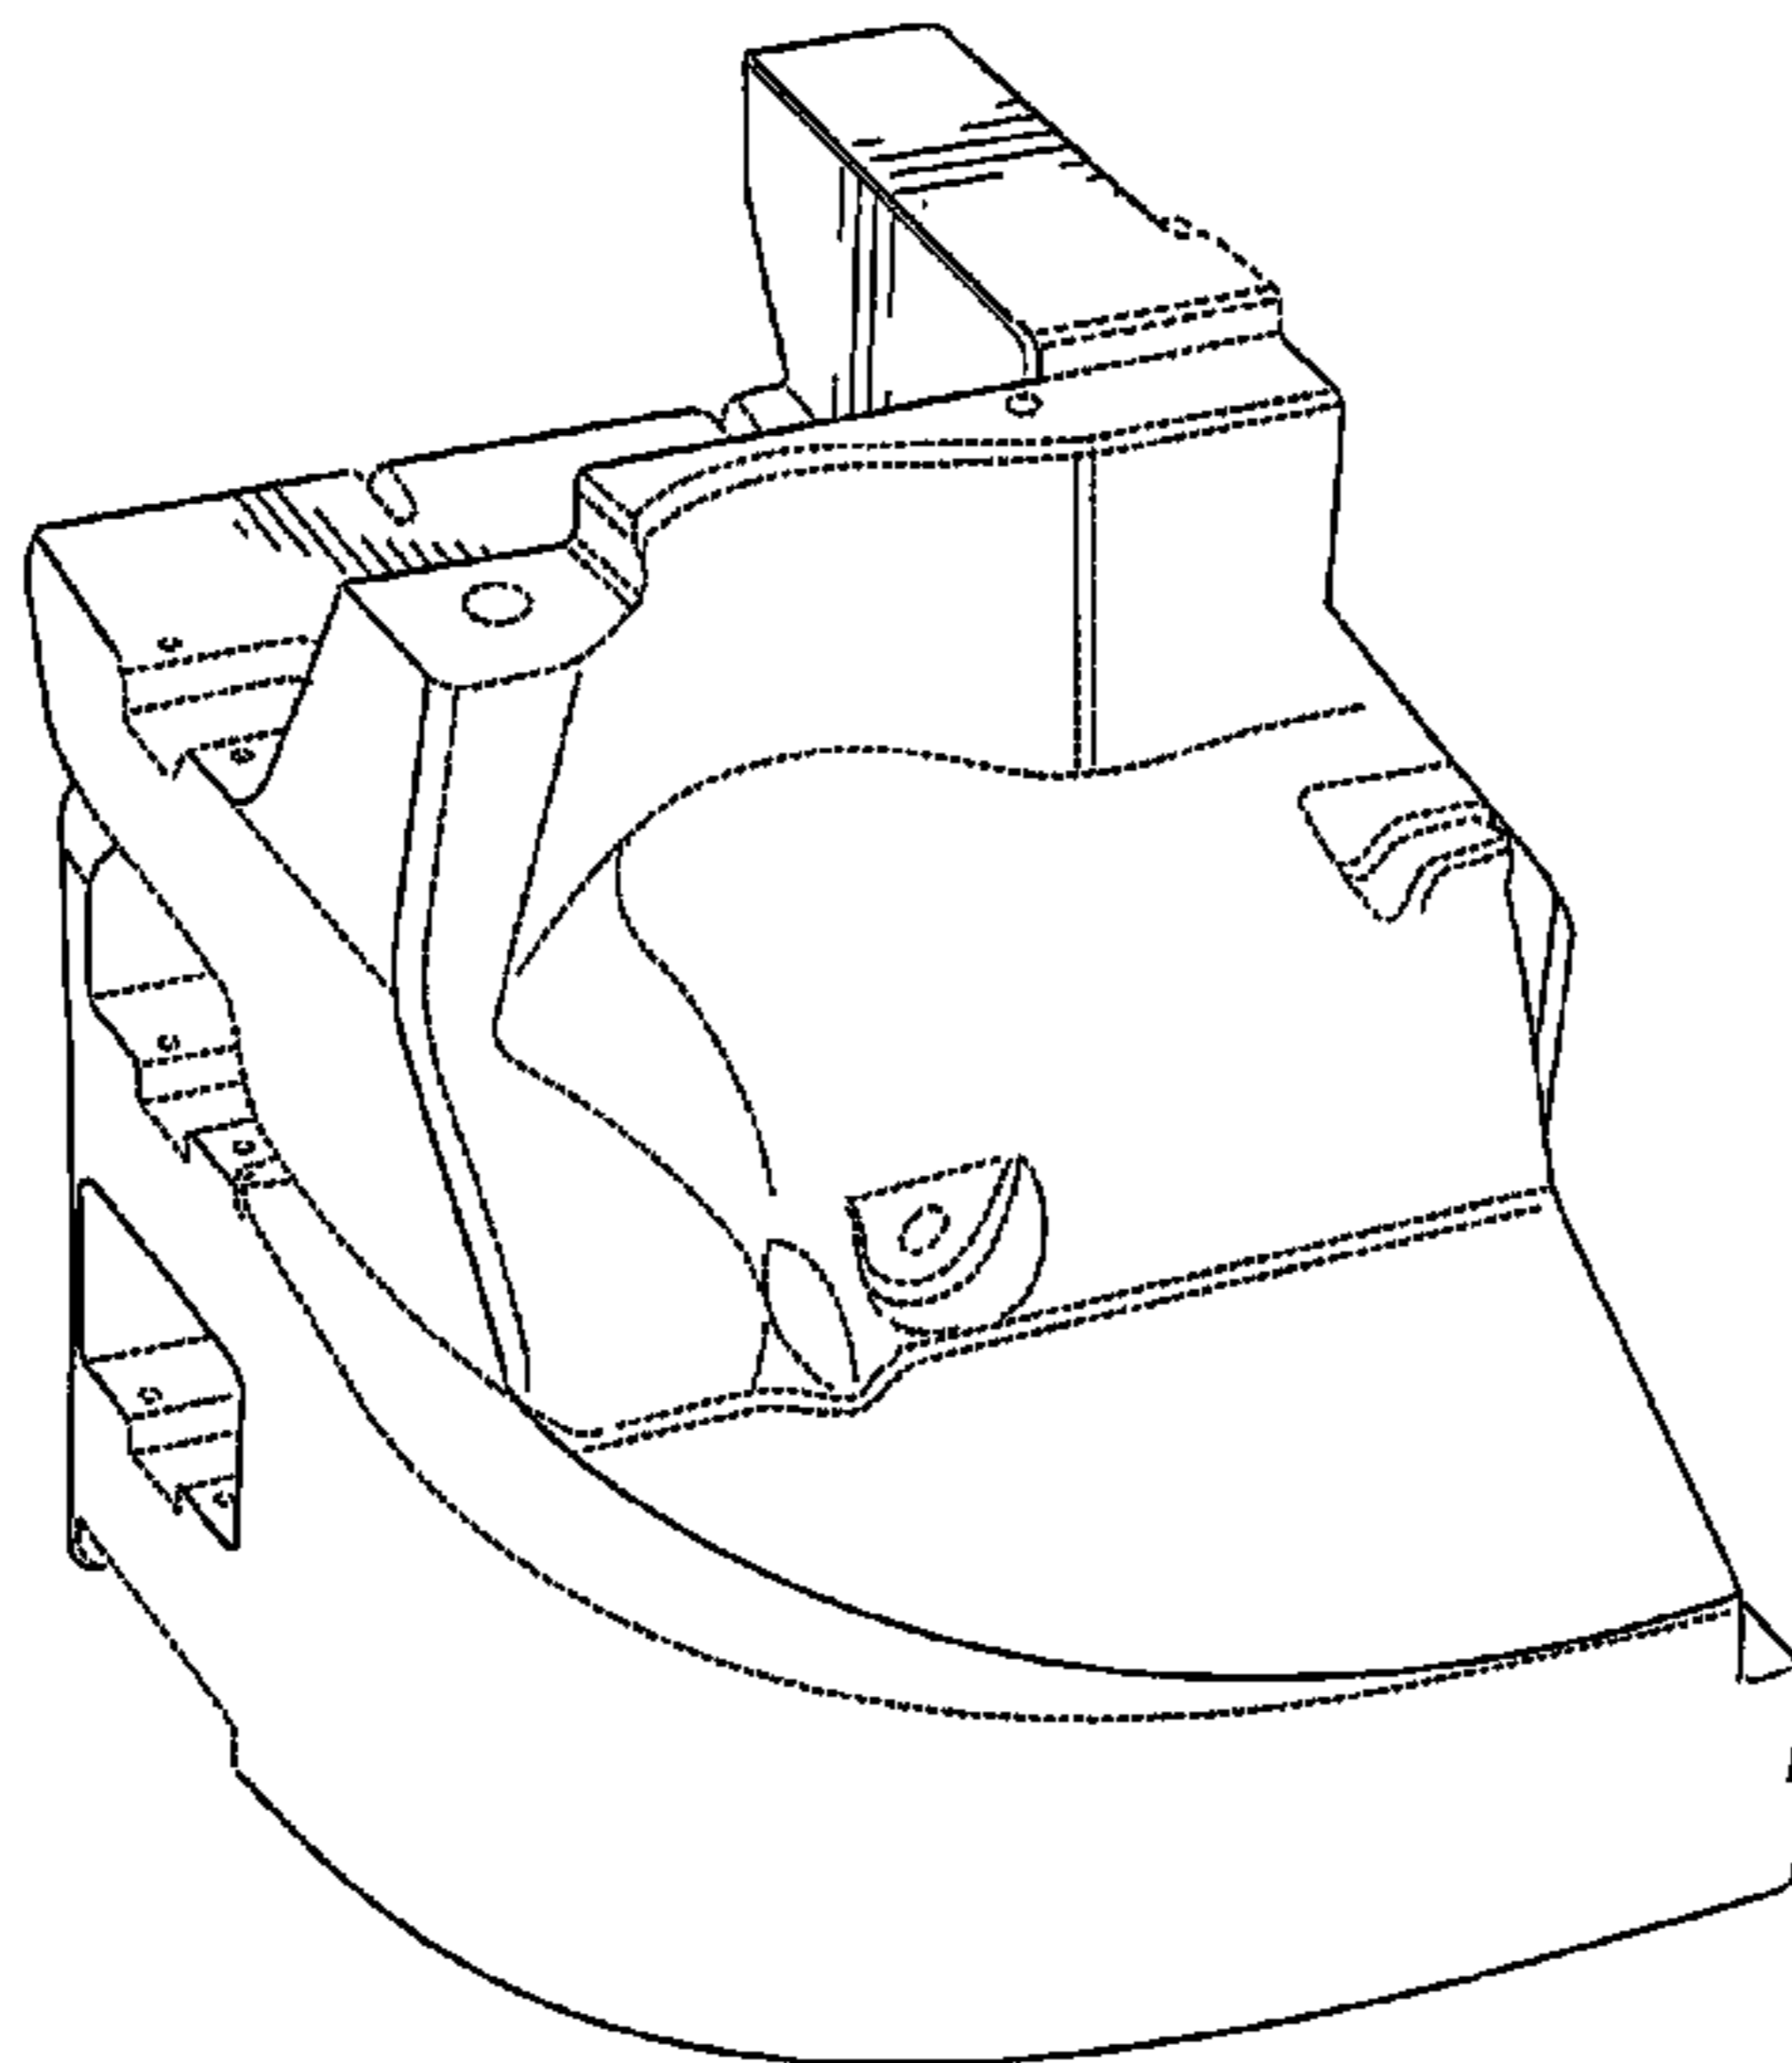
is another side view of the fuel tank assembly illustrated in FIG. 8.
